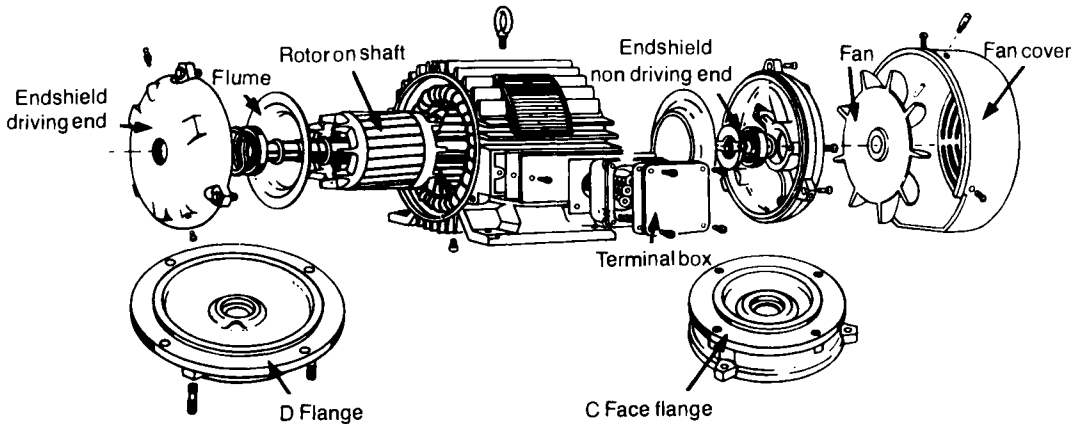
(c) Exploded view of induction motor (Farm Electric Handbook).
